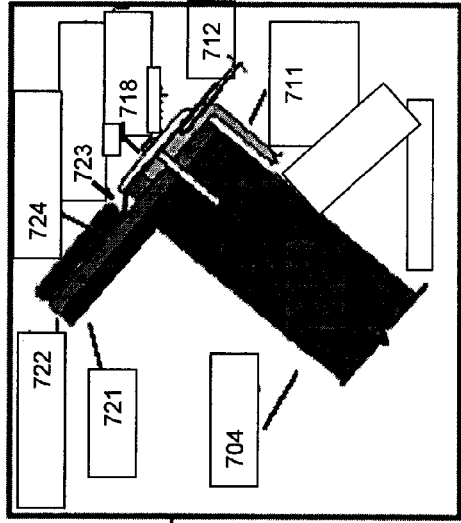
Top View Cladding Detail for Mounting Structure Interface
